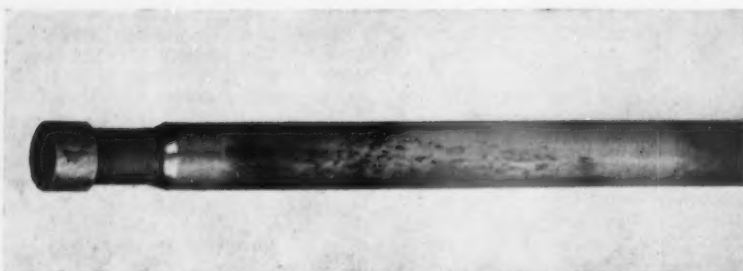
Severe scuffing has taken place between this valve stem and the guide because of dry operating conditions and carbon build-up in the clearance
